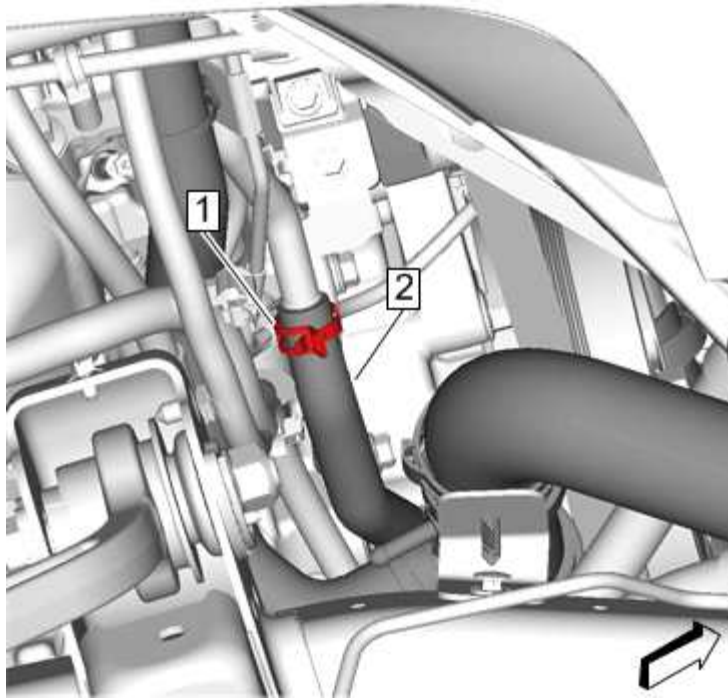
Radiator Outlet Hose And Heater Outlet Pipe
